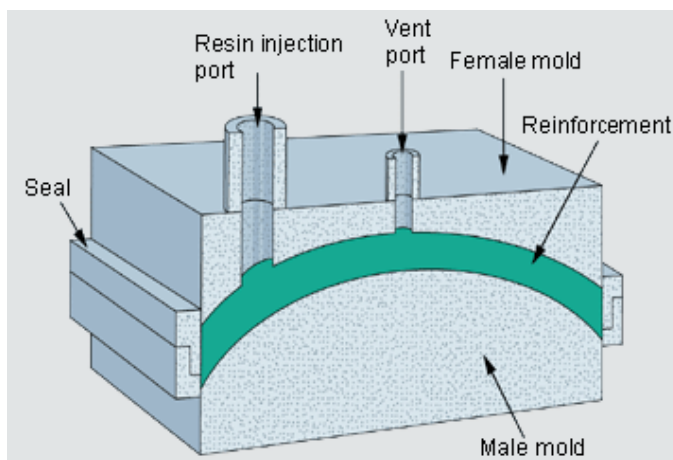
A Typical Mold for Resin Transfer Molding Process [67]
